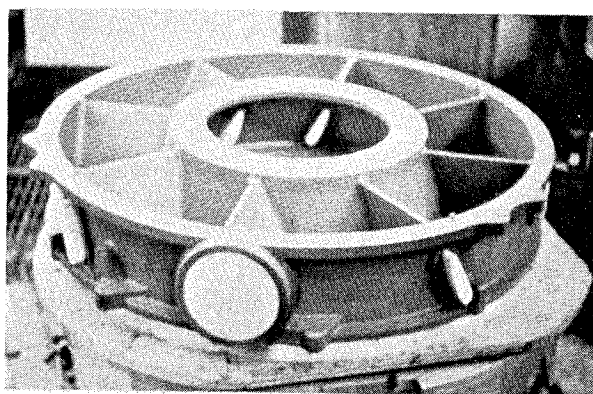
F100 intermediate compressor case wax pattern showing gearbox opening.
